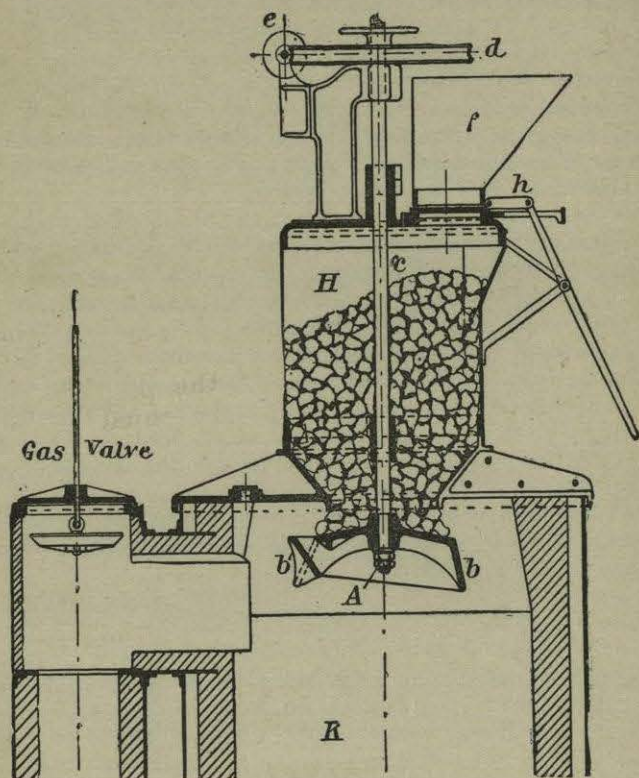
The Bildt Automatic Feed for Gas Producer—A, Distributing disc; H, coal-holder; K, producer; c, shaft for rotating A; d, e, gearing for rotating shaft; b, b', blades on disc, A; f, hopper; h, lever for discharging hopper into holder, H.
